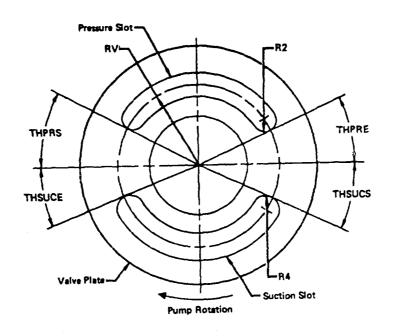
PUMP VALVE PLATE PARAMETERS
